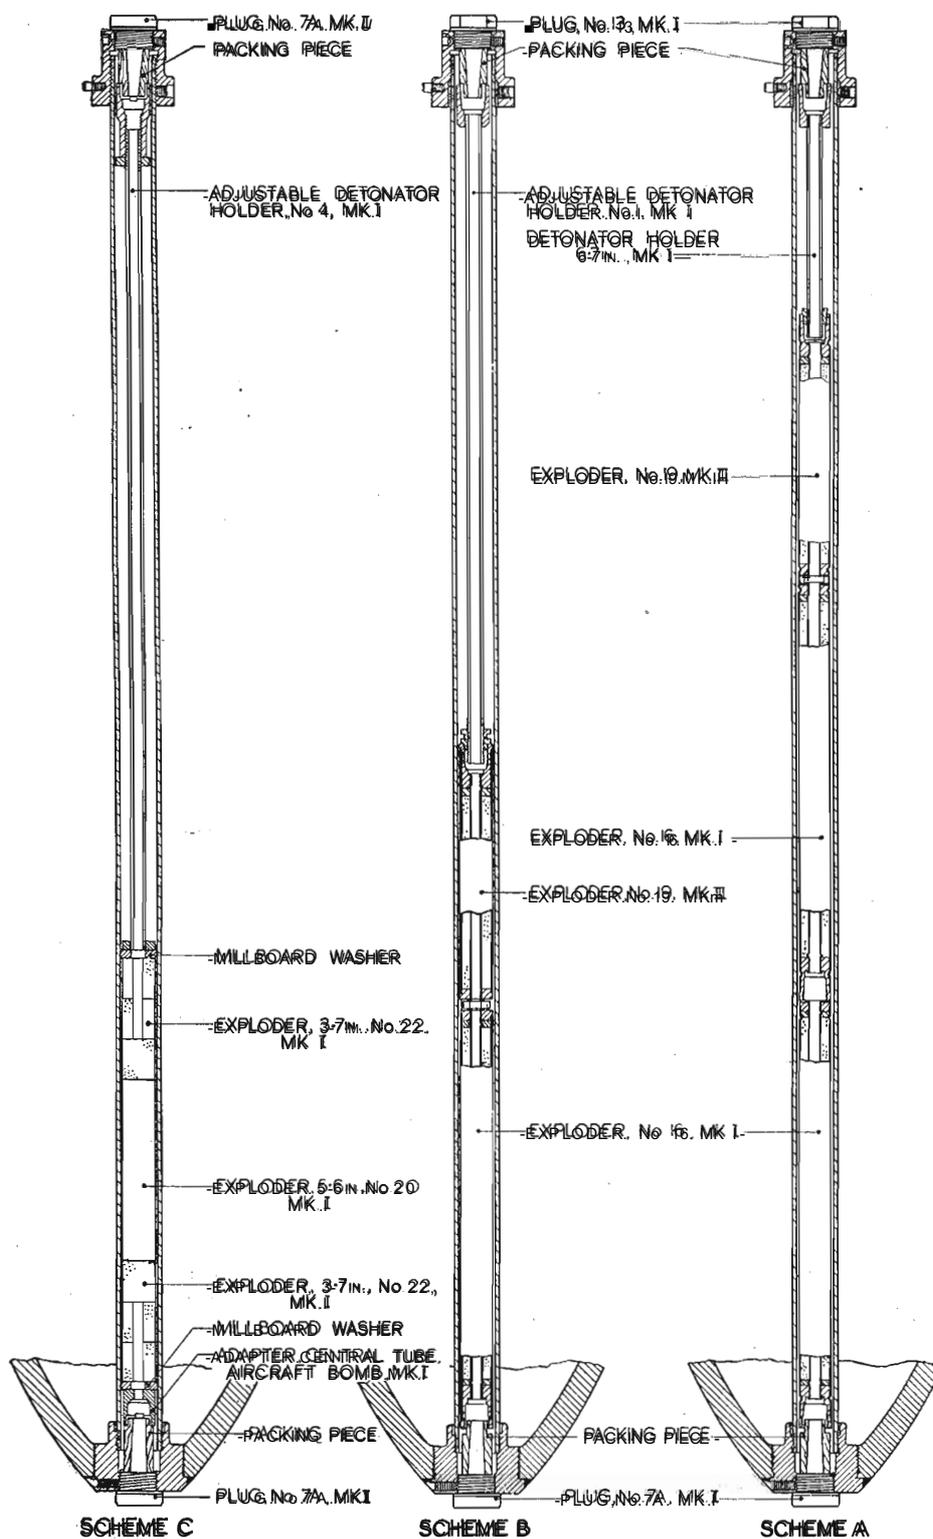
Bomb, H.E., aircraft, G.P., 250 lb., Mk. I, II, or III, exploded to Schemes A, B, and C
